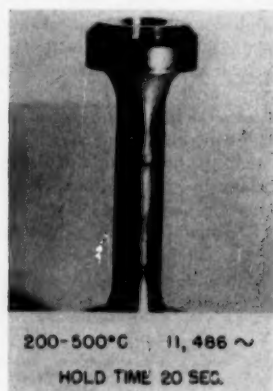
FATIGUE CRACK IN ANNEALED TEST SPECIMEN
